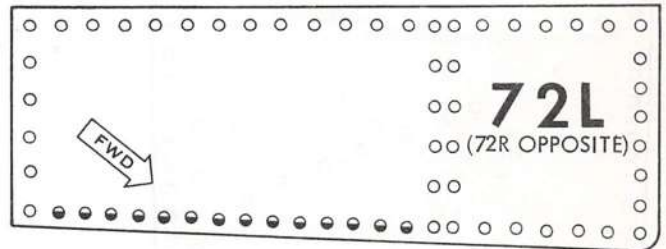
External Access Door Fastener Patterns (Sheet 2 of 7)
